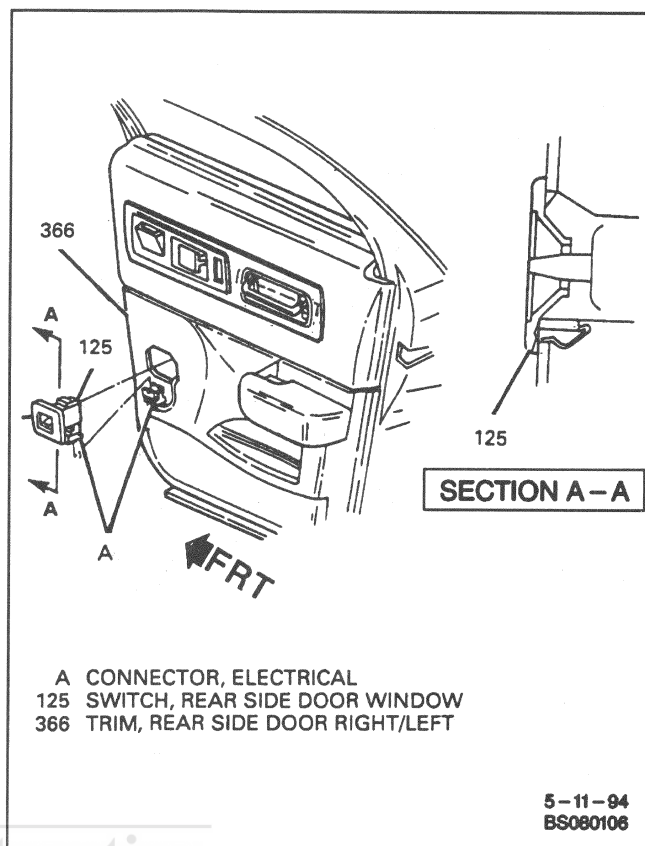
Removing Rear Side Door Window Switch-Chevrolet
